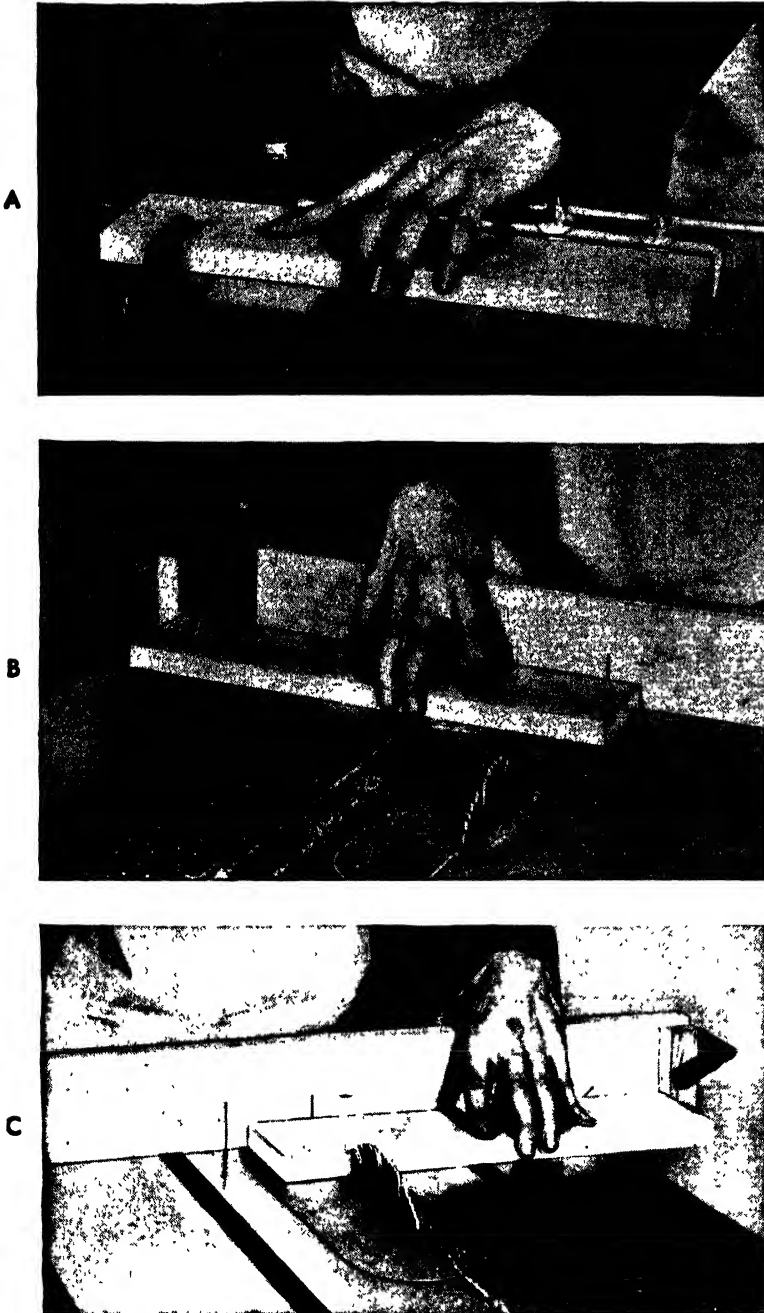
Three good methods for sawing several pieces to the same length: A, using the stop rod on the miter gage; B, using a stop block clamped to the ripping fence; C, using a stop block clamped to the wood facing of the miter gage. (Delta Power Tool Division, Rockwell Manufacturing Company)
